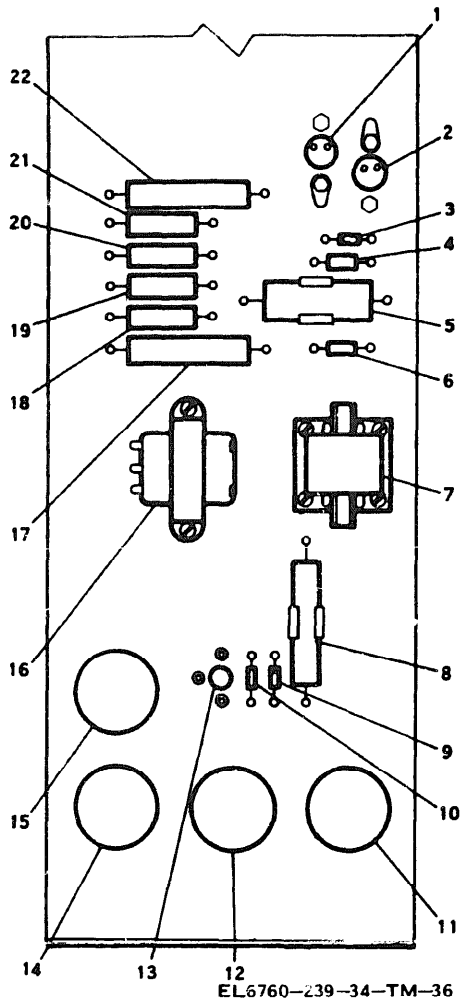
(5). Printed circuit board and component assembly A16, parts location (sheet 3 of 5).
